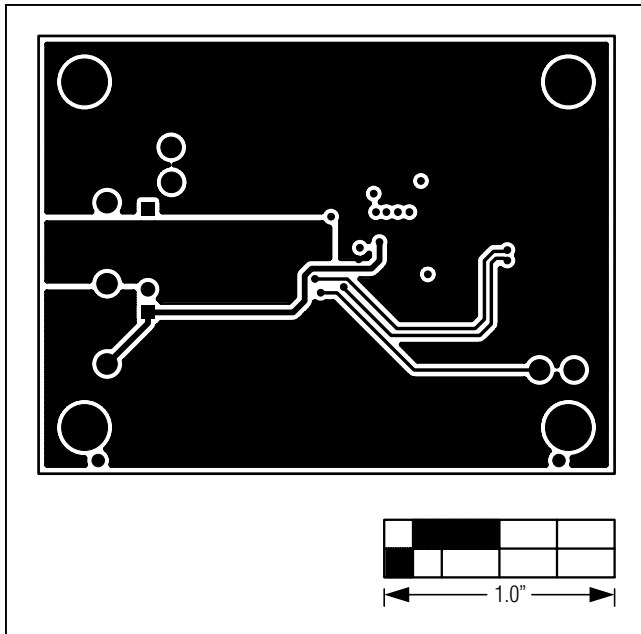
MAX16952 EV Kit PCB Layout—PGND and SGND Layer 3
